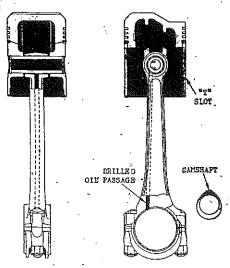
Correct assembly of piston and rod on 278, 308, 361, 426, 451 and 477 engines
